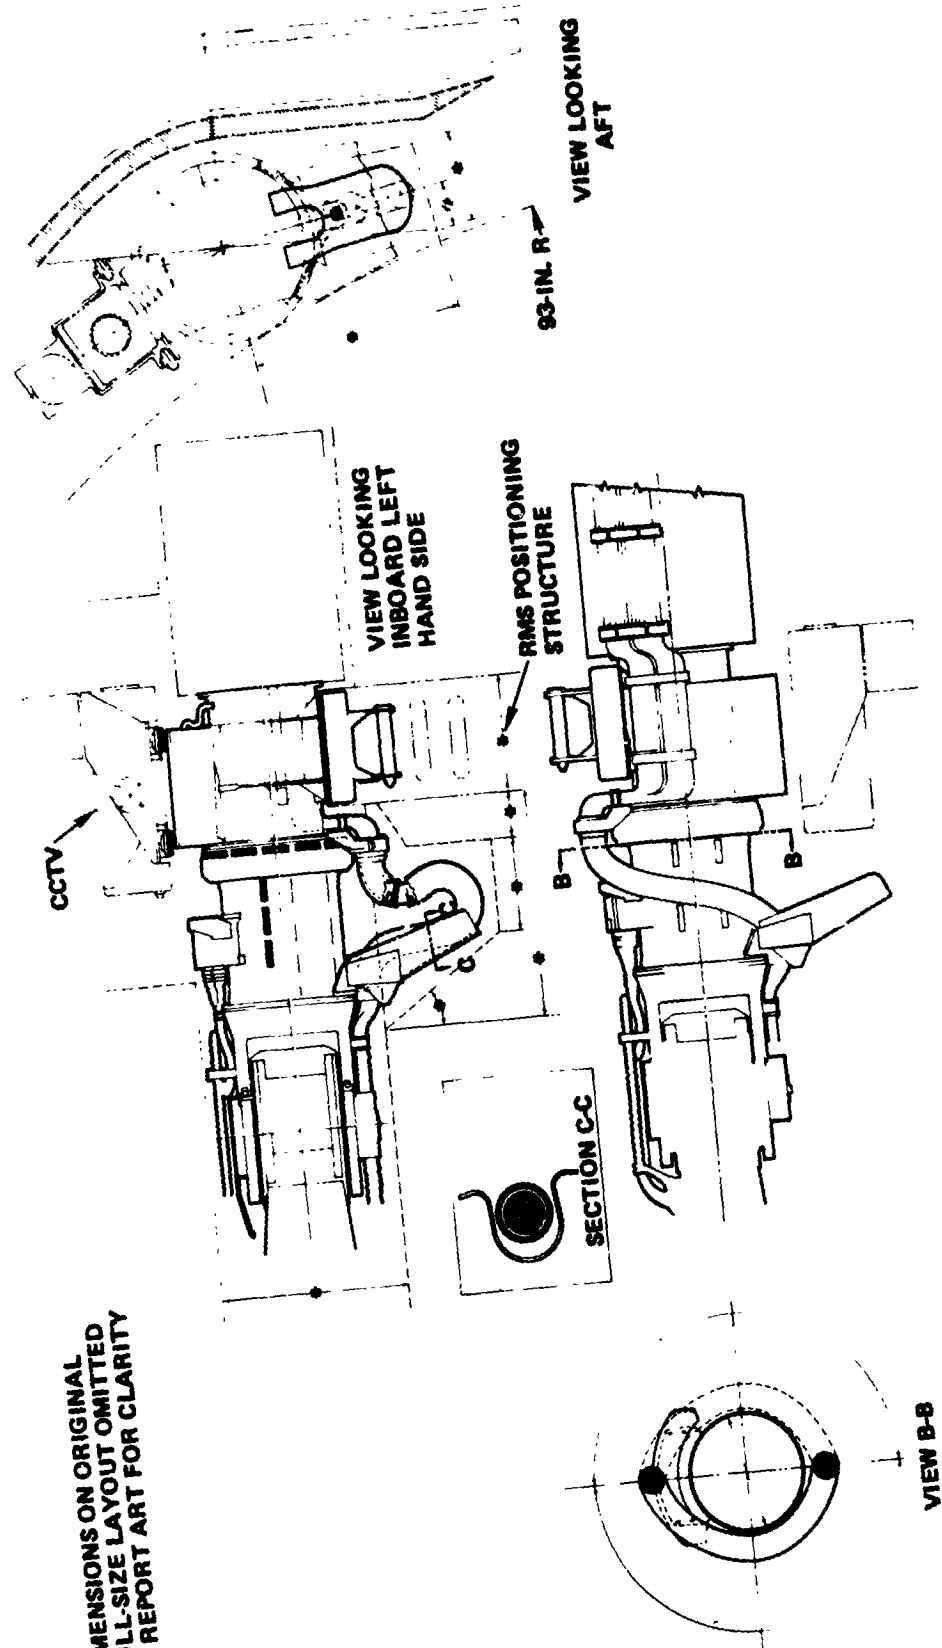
Cable Handling System - Wrist-Roll Joint
